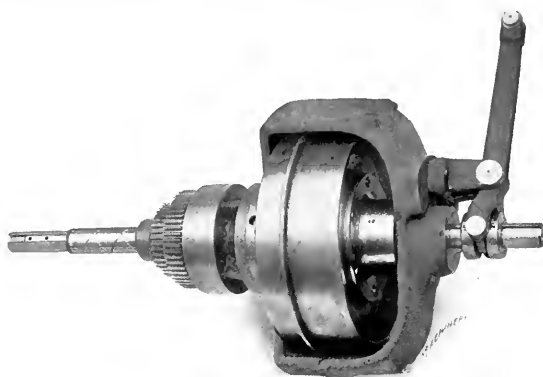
Reverse Mechanism for Use on the "Libby" Turret Lathe does away with the necessity for using a reversible countershaft or reversing motor in cases where the performance of tapping operations requires the lathe to be reversed at fre-
